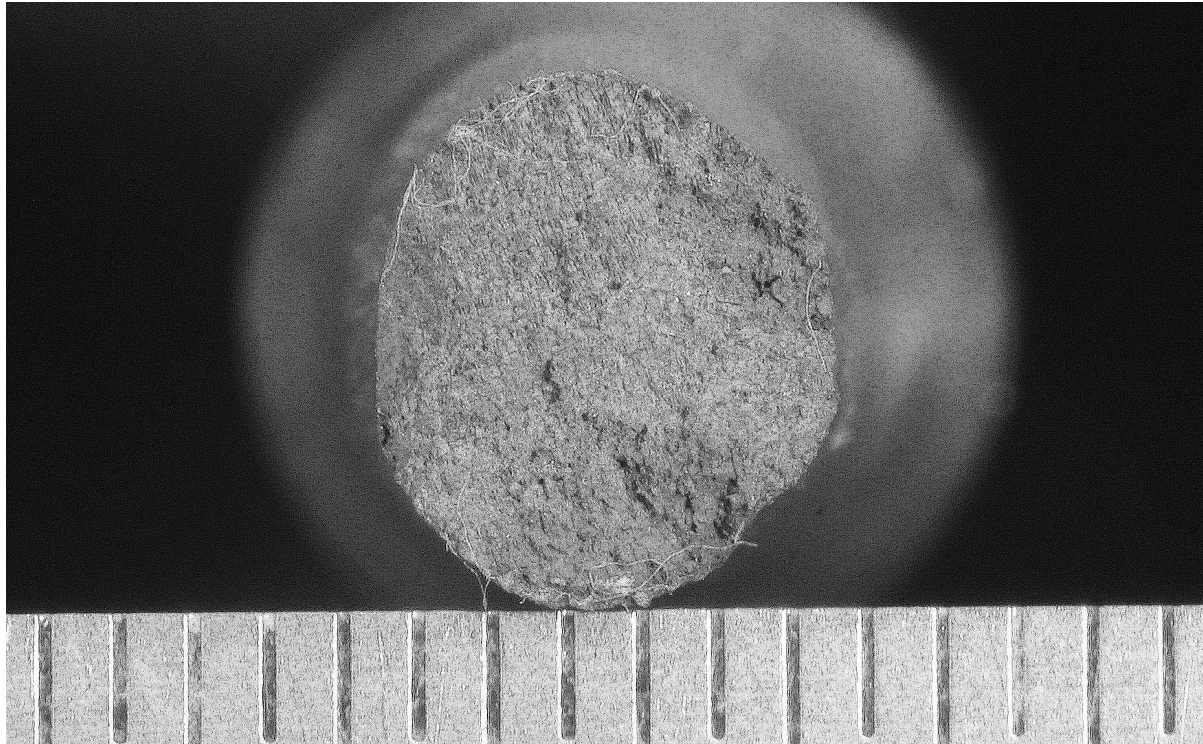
Macro-photographic image of the fracture surface of the specimen S2 halve demonstrated on the left-hand side in figure 26.
